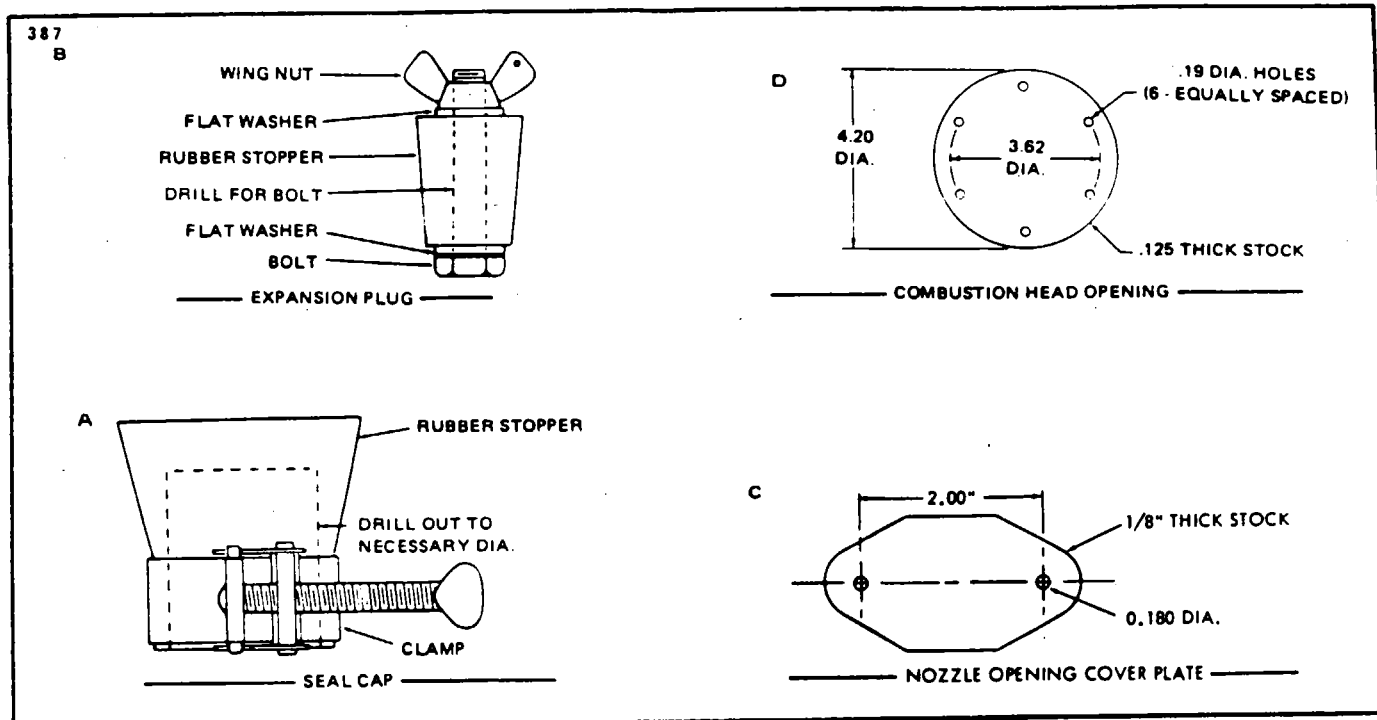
Suggested Design for Seal Plate, Plugs and Caps for Combustion Leakage Test
